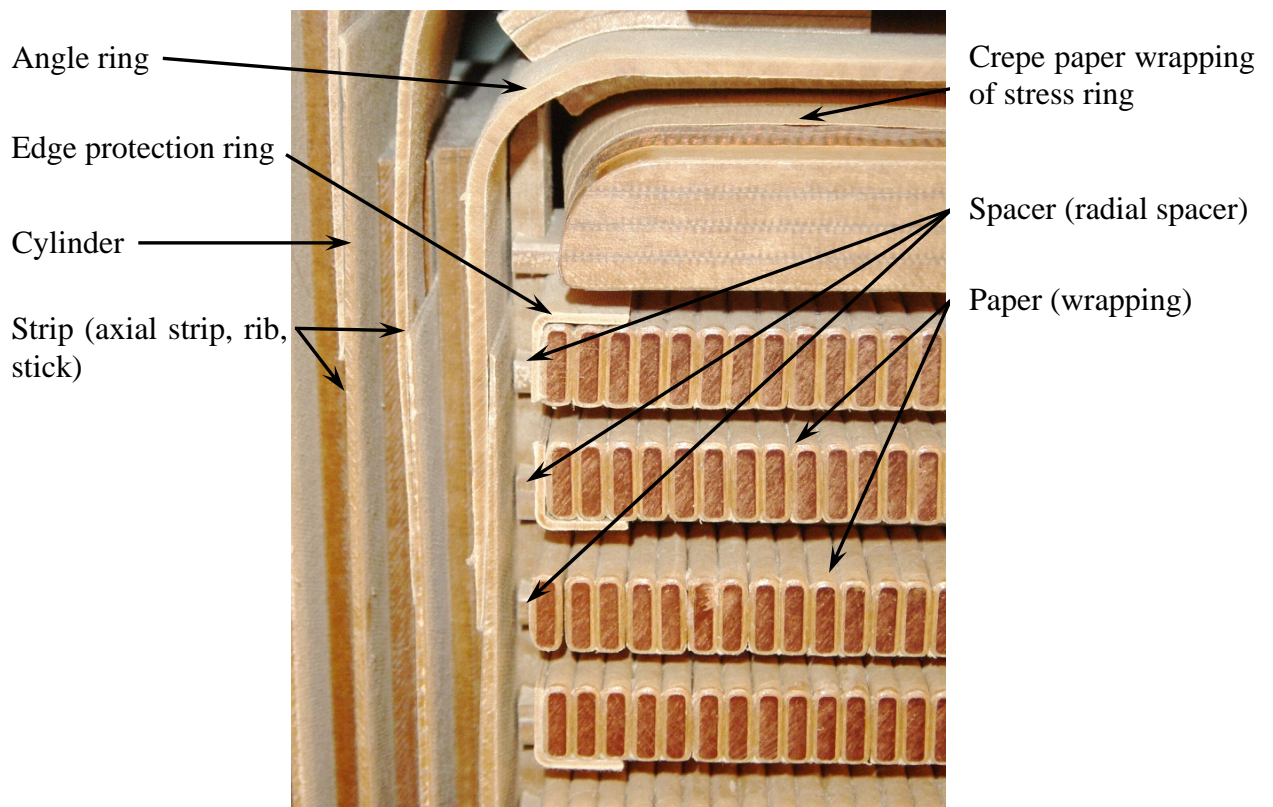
Cross-sectional view of a 400 kV transformer end insulation (detail).
